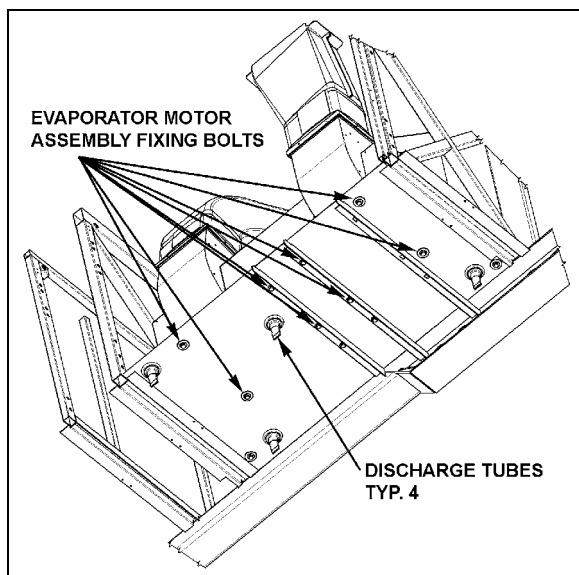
EVAPORATOR MOTOR ASSY FIXING BOLTS
